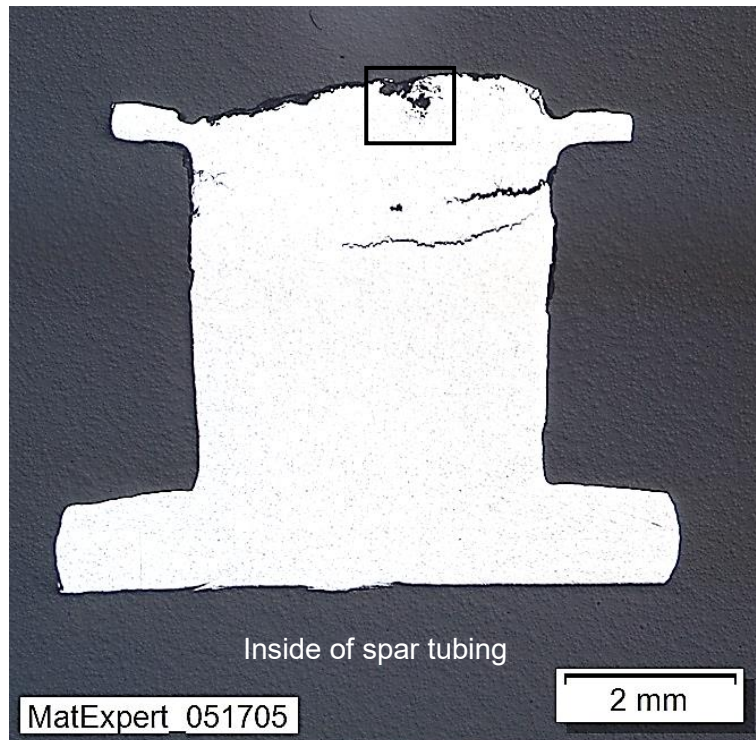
Cross section of broken rivet N5 with intergranular corrosion.
